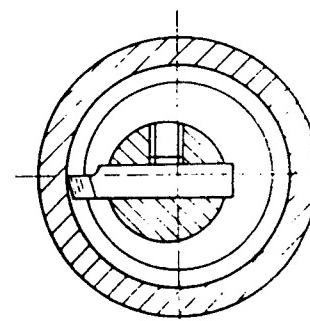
Cutting Edge of Tool Bit Set on Centre for Internal Threading
